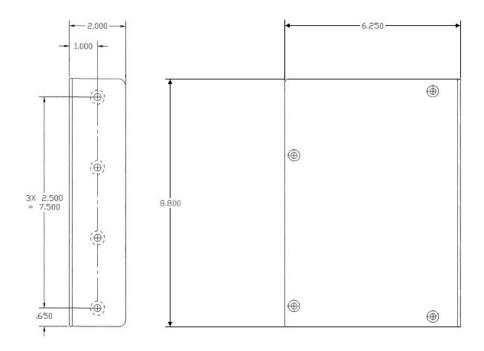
Shelf-Mount Stabilizing Plate, D39620
